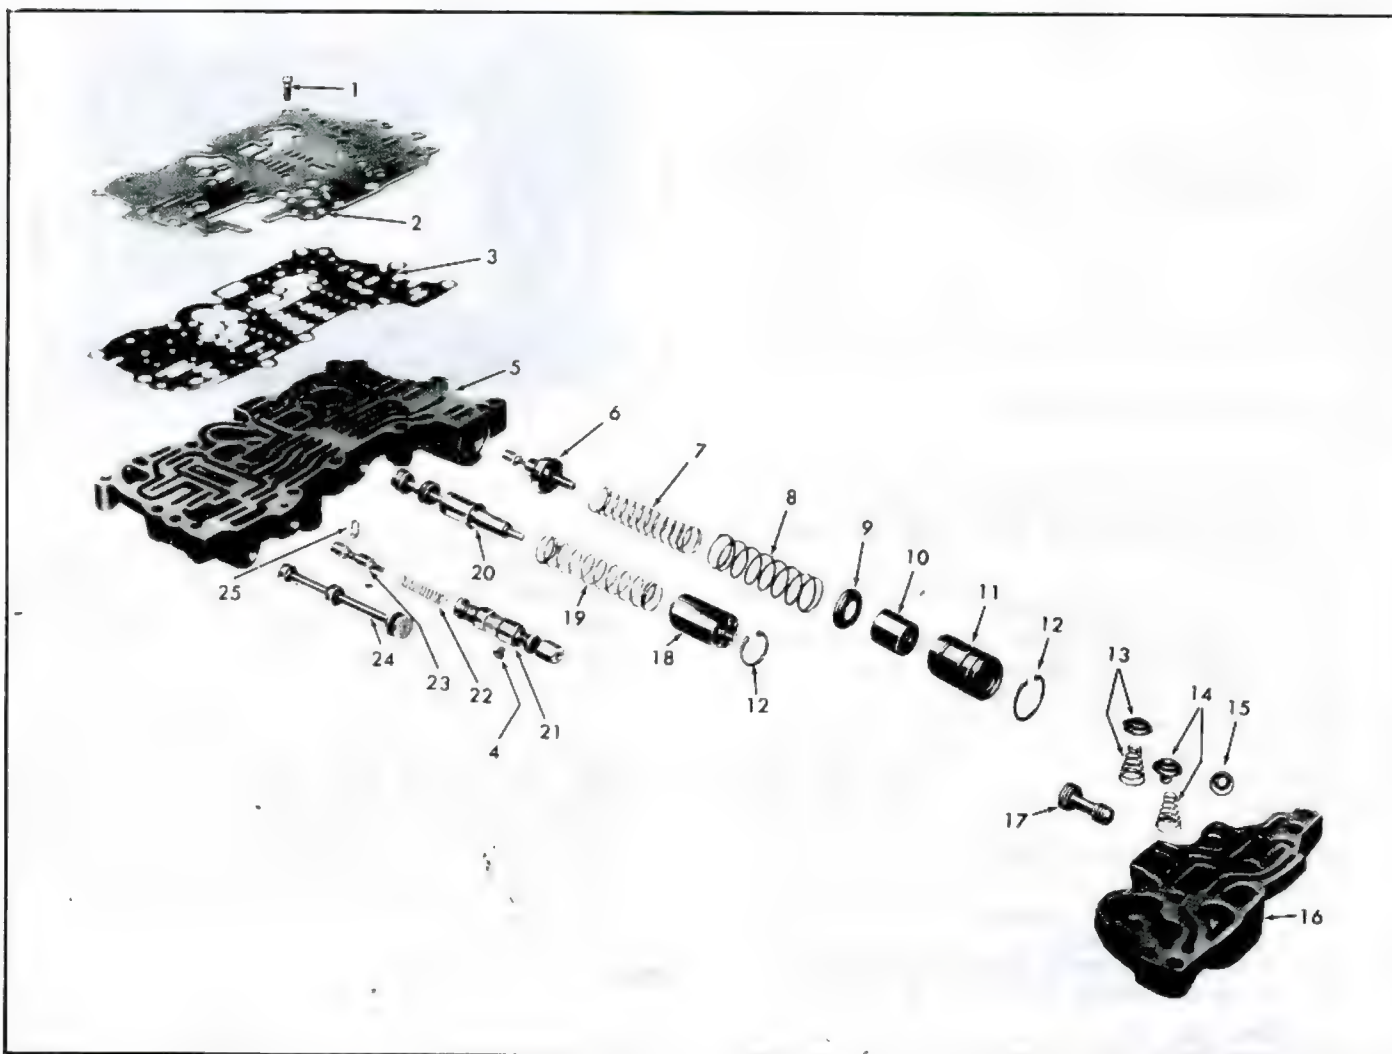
E-11—Corvair Powerglide Valve Body—Exploded View
